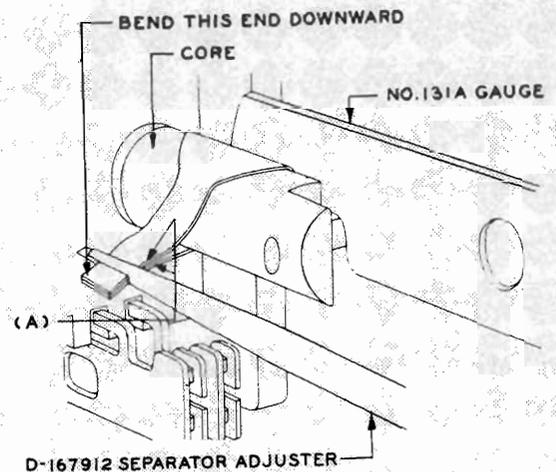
Method of Using the D-167912 Separator Adjuster
